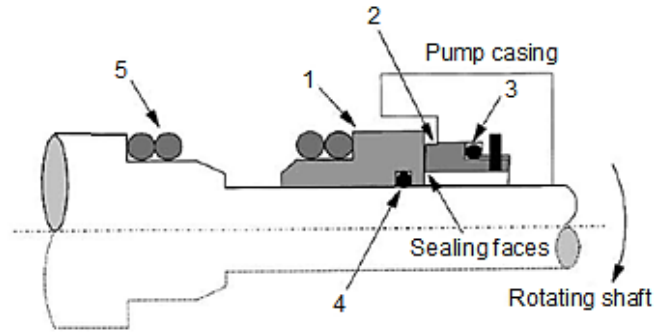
Schematic representation of a simple five–component mechanical seal: (1) rotary seal ring; (2) stationary seal ring; (3) stationary seal ring packing; (4) rotary seal ring packing; (5) spring [104].
